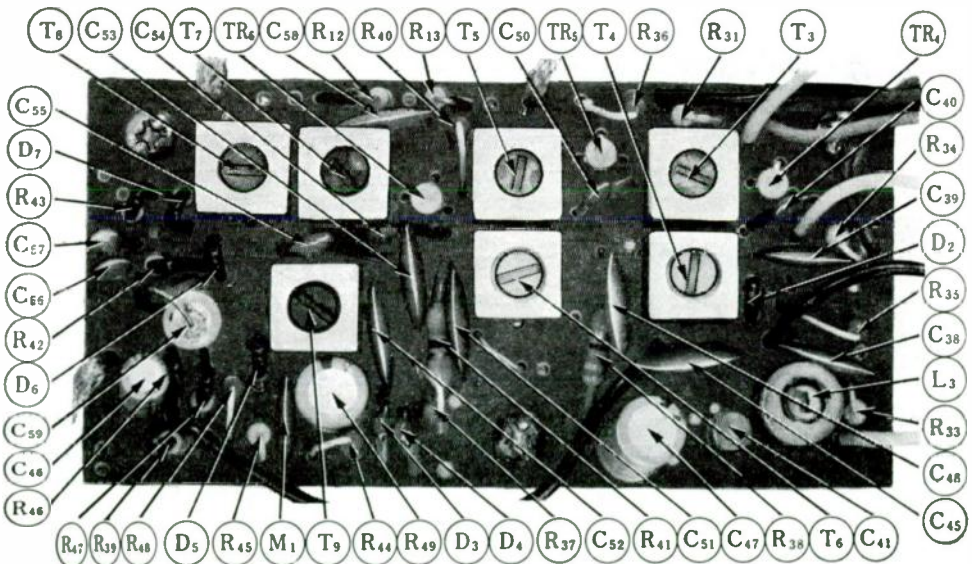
B - Component View parts identification, IF section. Courtesy of Panasonic.
